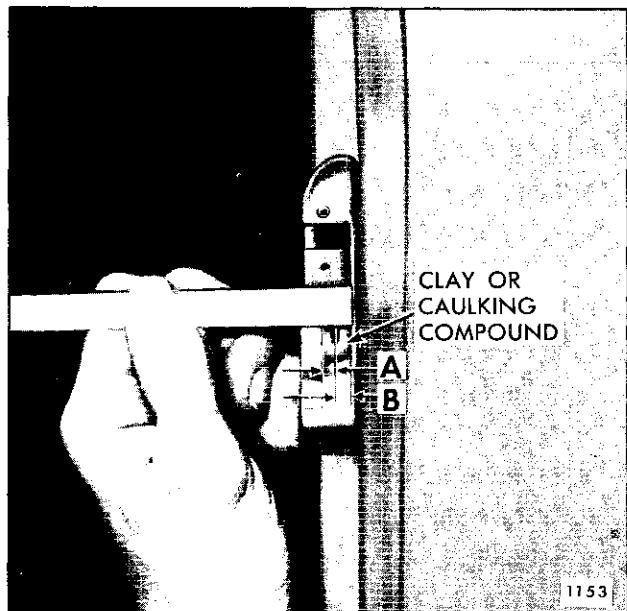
Tail Gate Lock Striker Caulking Check
